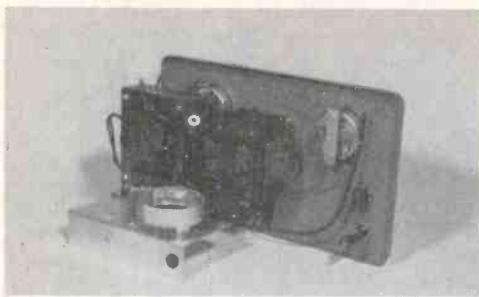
The B-10 with most components mounted. Filter subassembly is on small chassis
